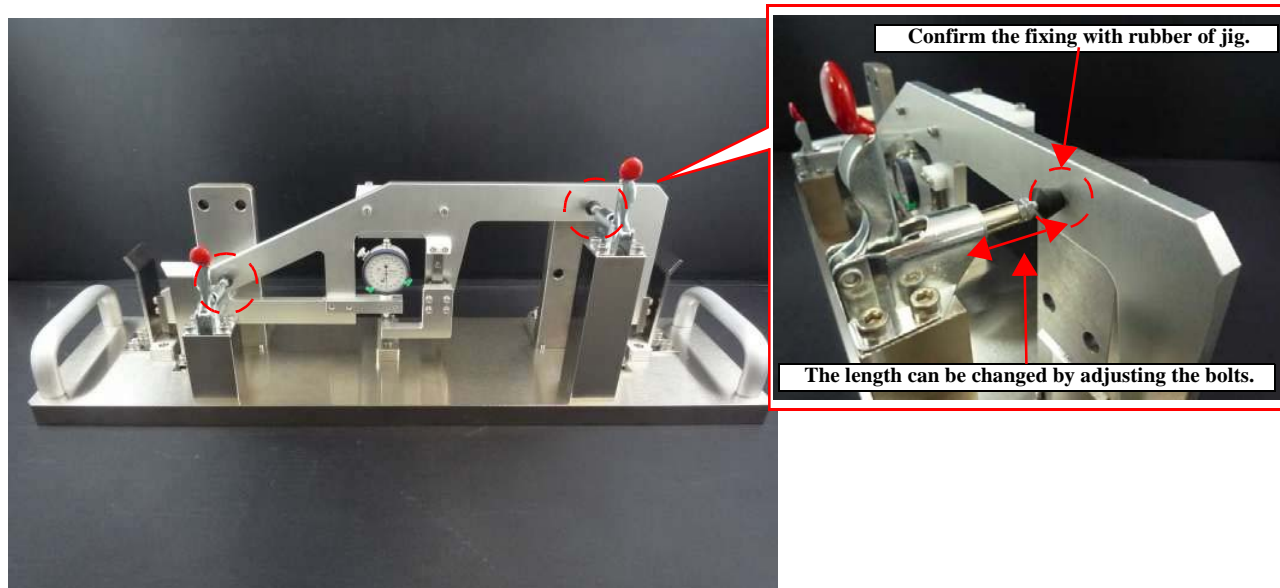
Setting the PF Roller Adjustment Jig to the PF Roller Adjustment Jig Stand
